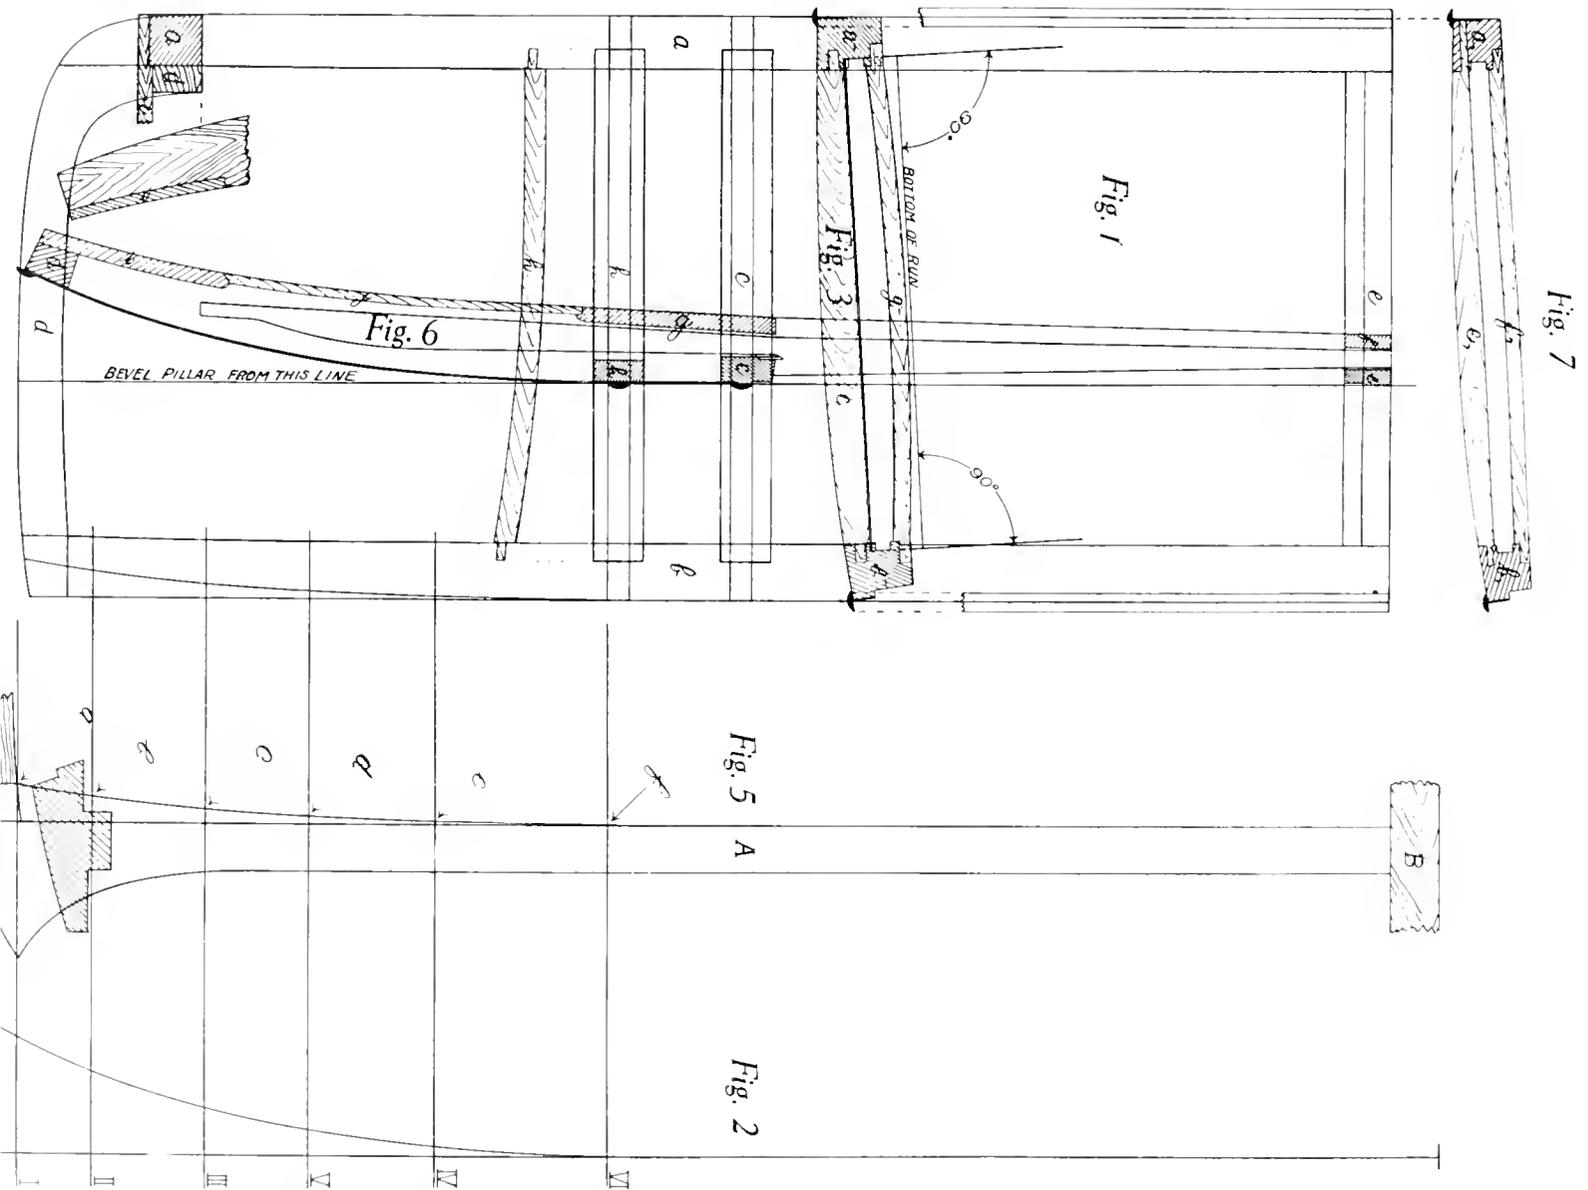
shows two methods for framing the outside top rail e into the door pillars. Either method will be found practical. The joint used for framing the top rail e into the hinge pillar a is that of a bastard tenon. In framing the top rail e into the lock pillar b we use a stump tenon. The inside rail f is rabbeted into both pillars. Great care should be taken in framing the outside top rail e into the pillars, being sure to get a tight-fitting joint and as much stock outside of the tenon as practical.
